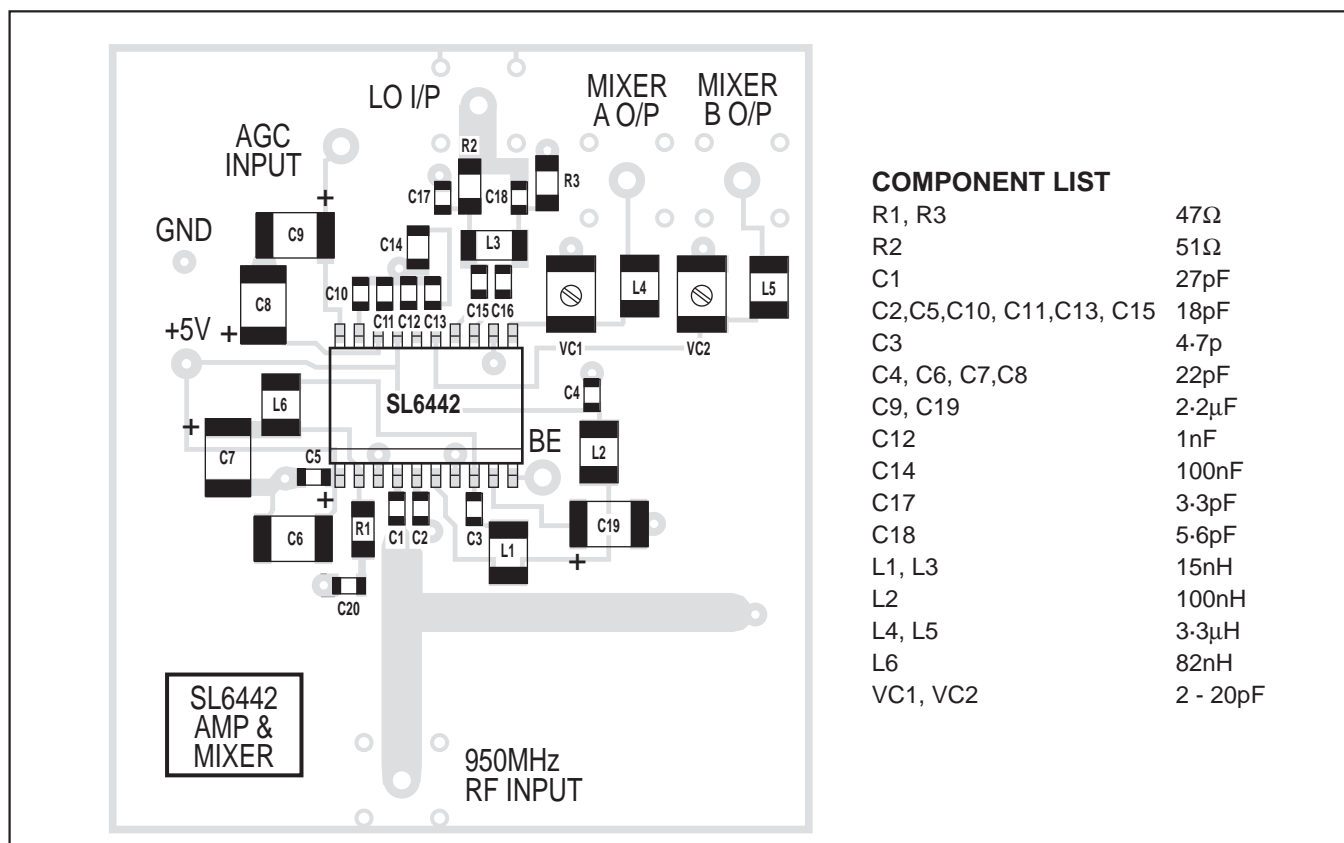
SL6442 demonstration board component layout. Scale=2 x full size. Input and output coaxial connectors are mounted on the ground plane side of the board.
